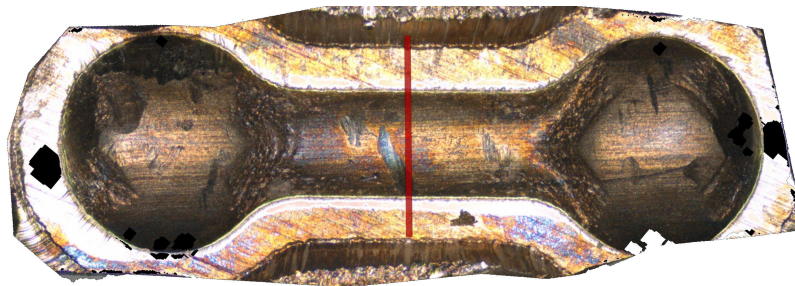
Micro-EDM tool path for machining of die for cardan-shaft.
